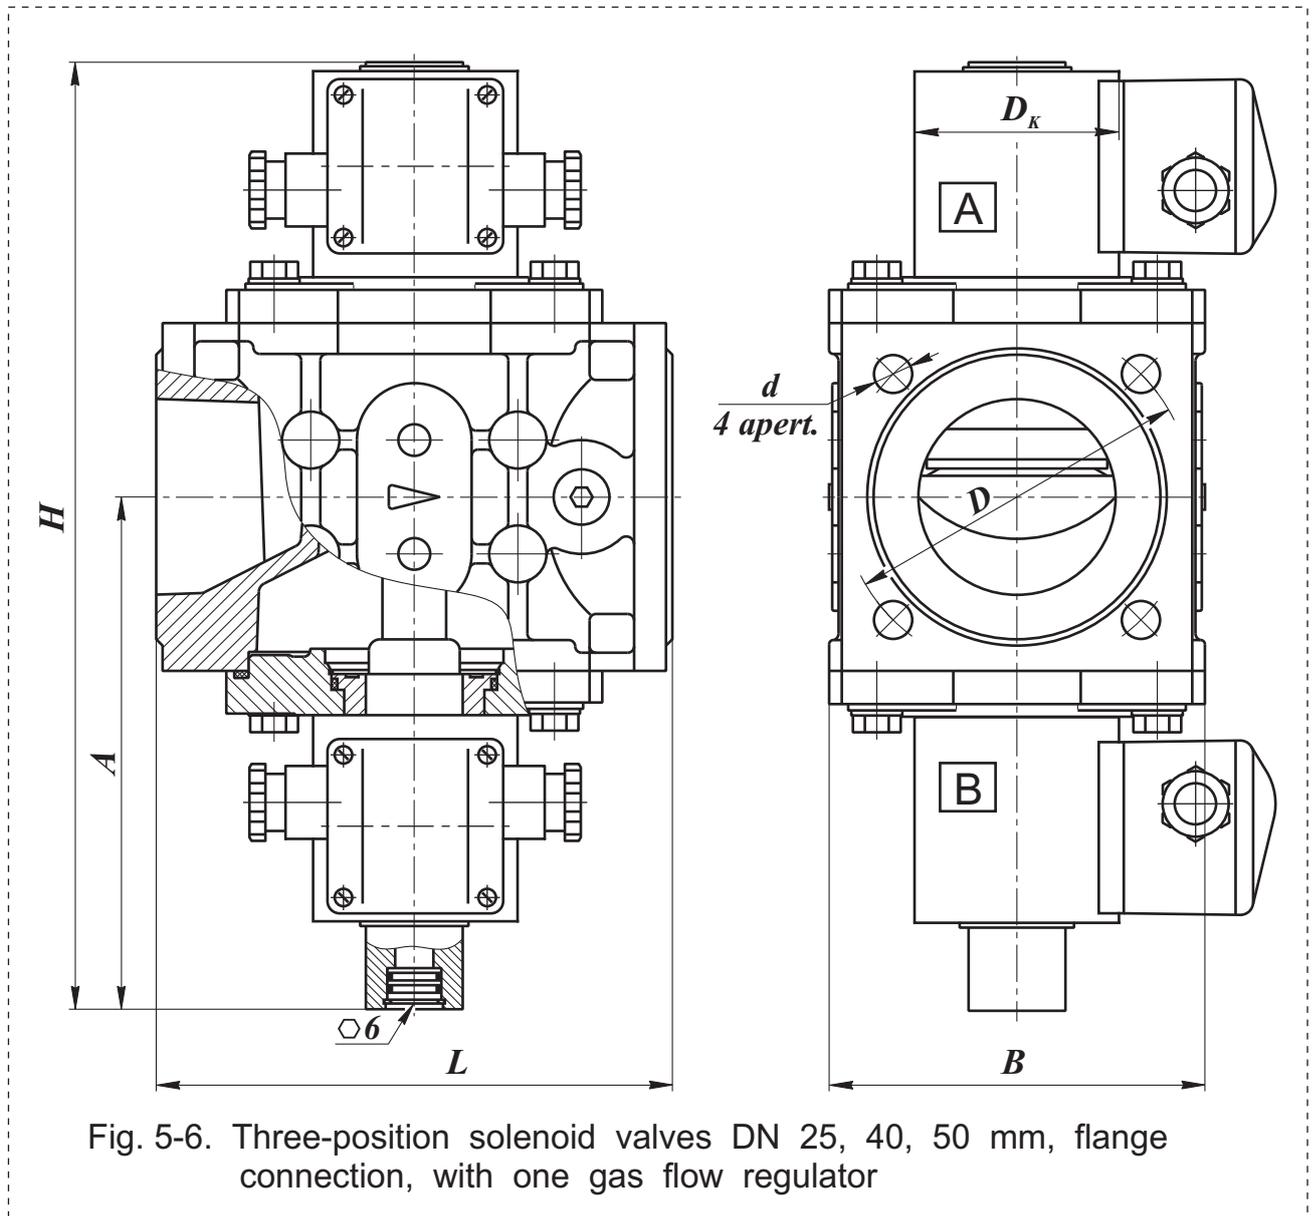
Three-position solenoid valves DN 25, 40, 50 mm, flange connection, with one gas flow regulator
